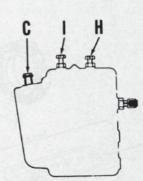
Drawing showing location of low idle speed screw (I), high idle speed screw (H) and torque control screw (C) on all models except 834 and L54.
